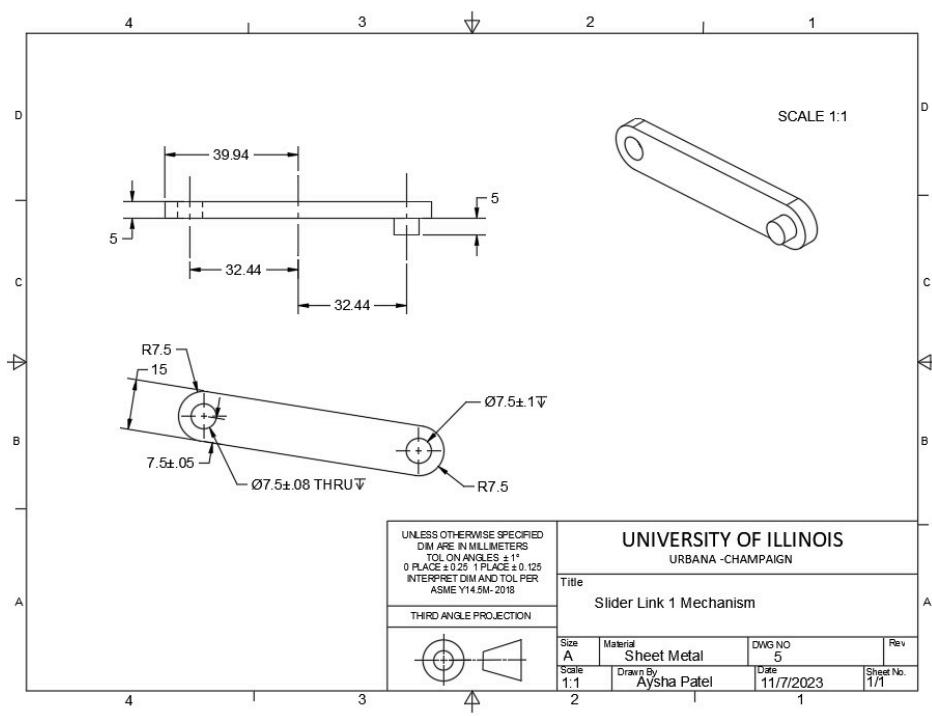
Link 1 Mechanism Dimensioned Drawing
